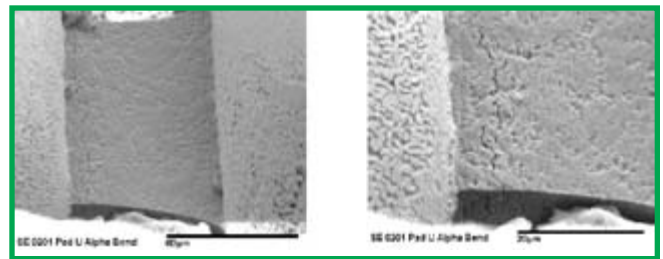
Trace cracks on PCB after bend test.
